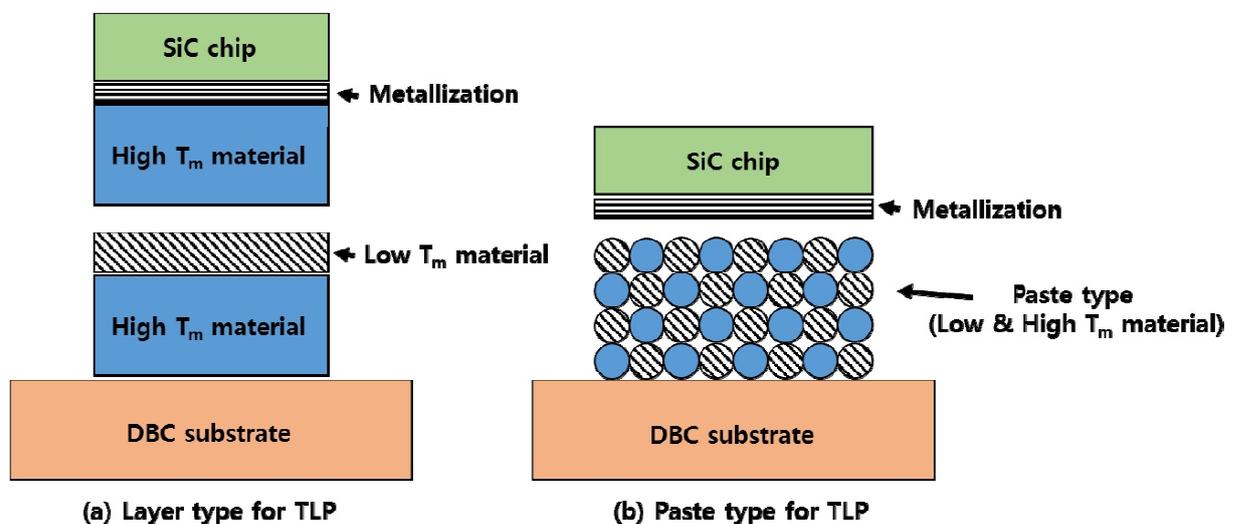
Schematic illustration of TLP bonding technologies; (a) layer type and (b) paste type.
